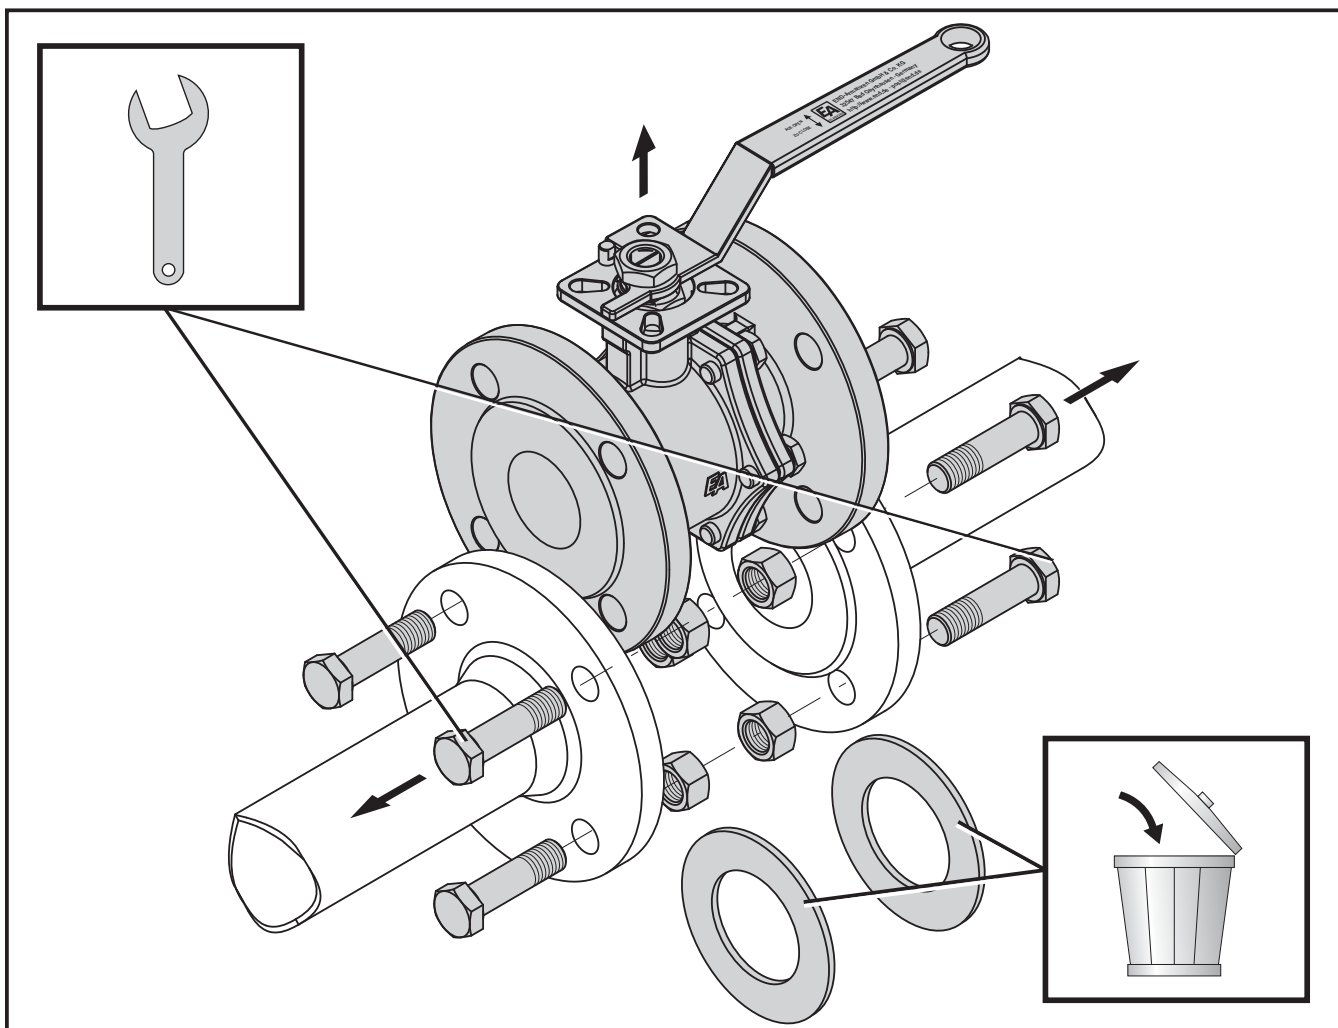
Ball valves, replacement of the sealing kit: removal of the ball valve (Fig.: Art. ZP311007)
